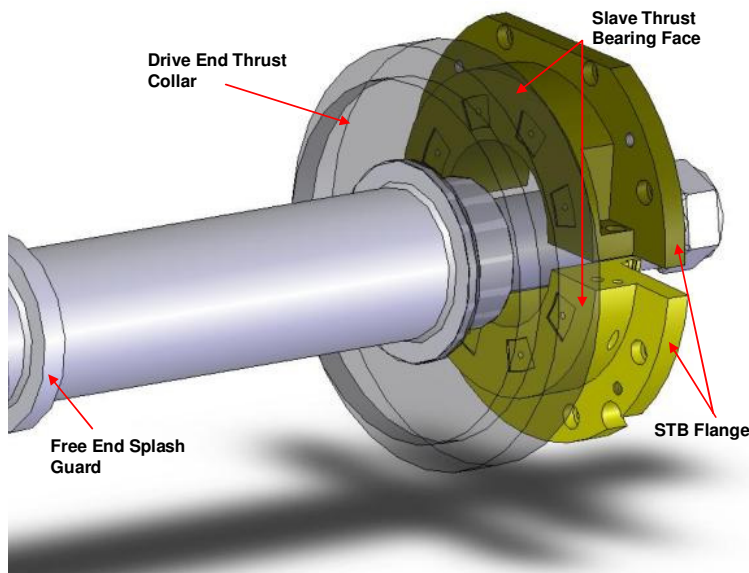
Exploded view of slave thrust bearing (depicted split) and drive end thrust collar (depicted transparent) on the rotor shaft
